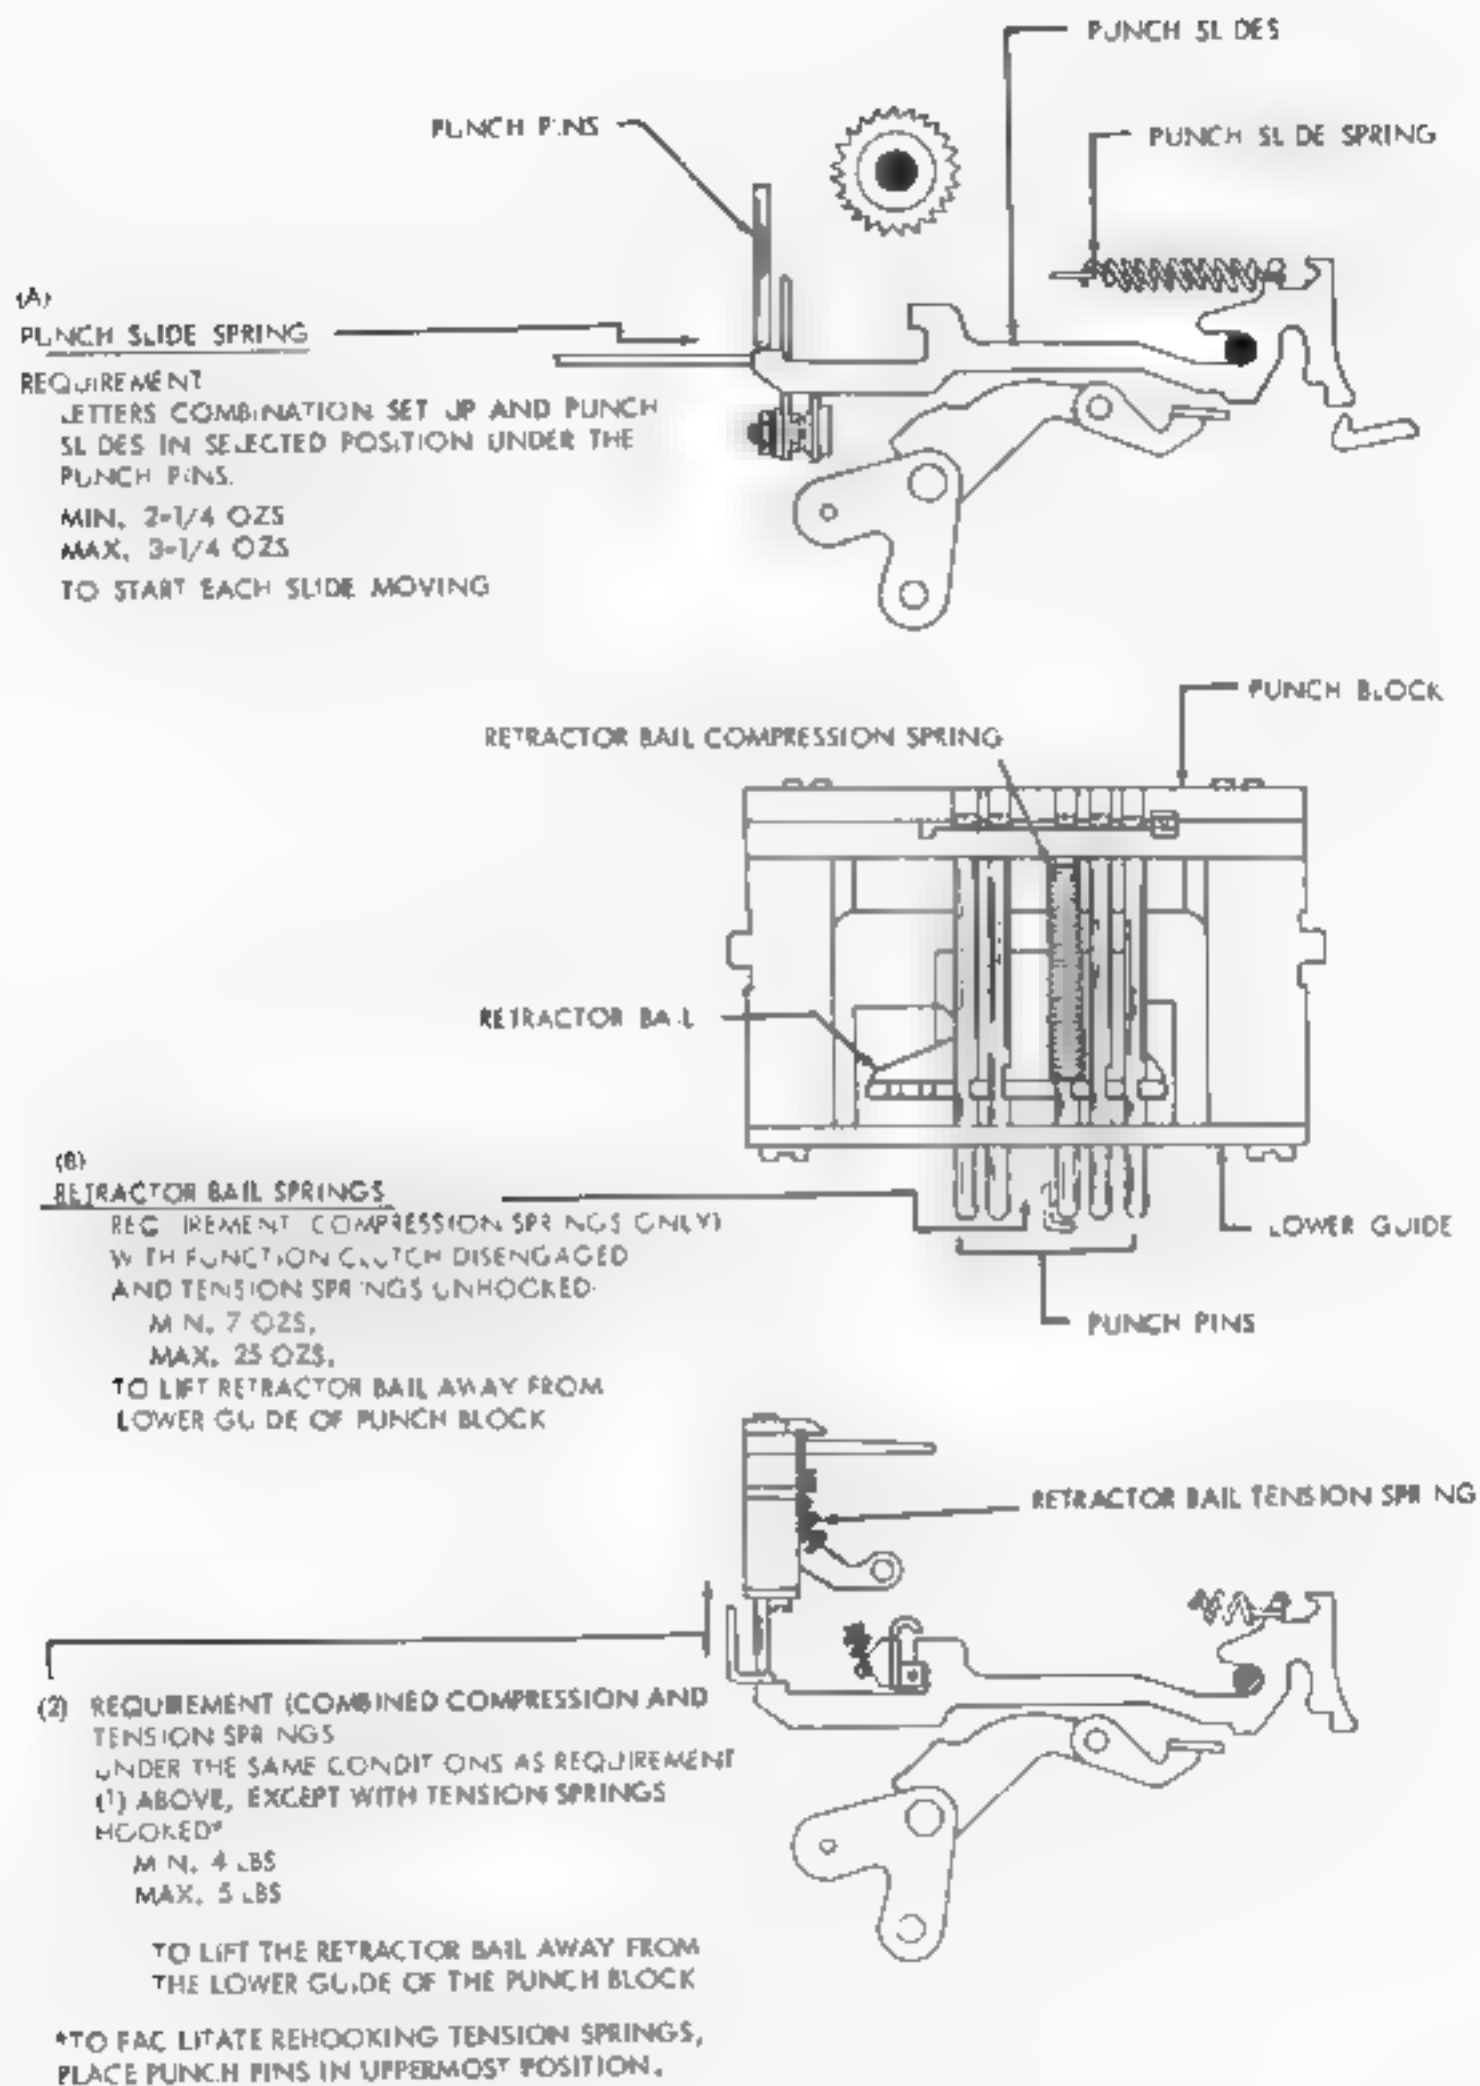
PERFORATOR MECHANISM FOR CHADLESS TAPE
